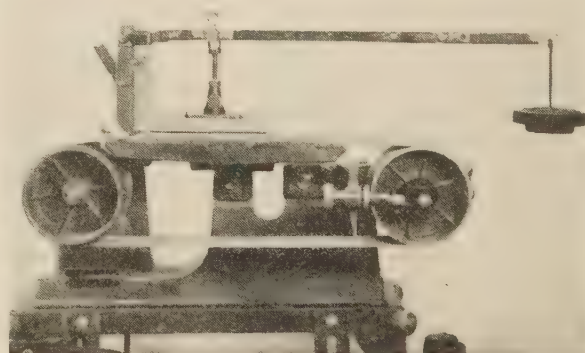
SANDING MACHINE SHOWING ARRANGEMENT OF PRESSURE-CONTROL MECHANISM
